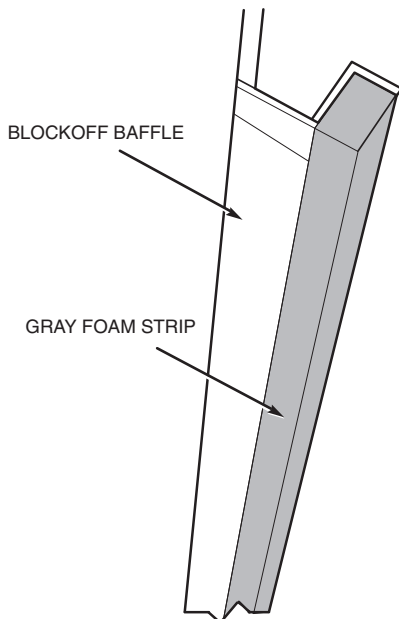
Adding Seal Strip to Block-Off Baffle
